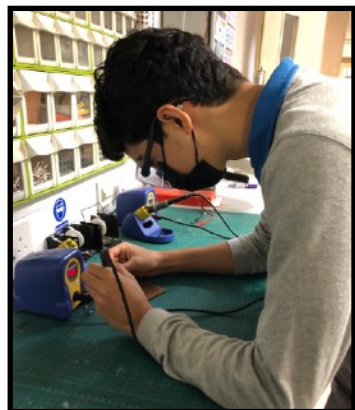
Using the soldering iron with safety glasses (for protection)
